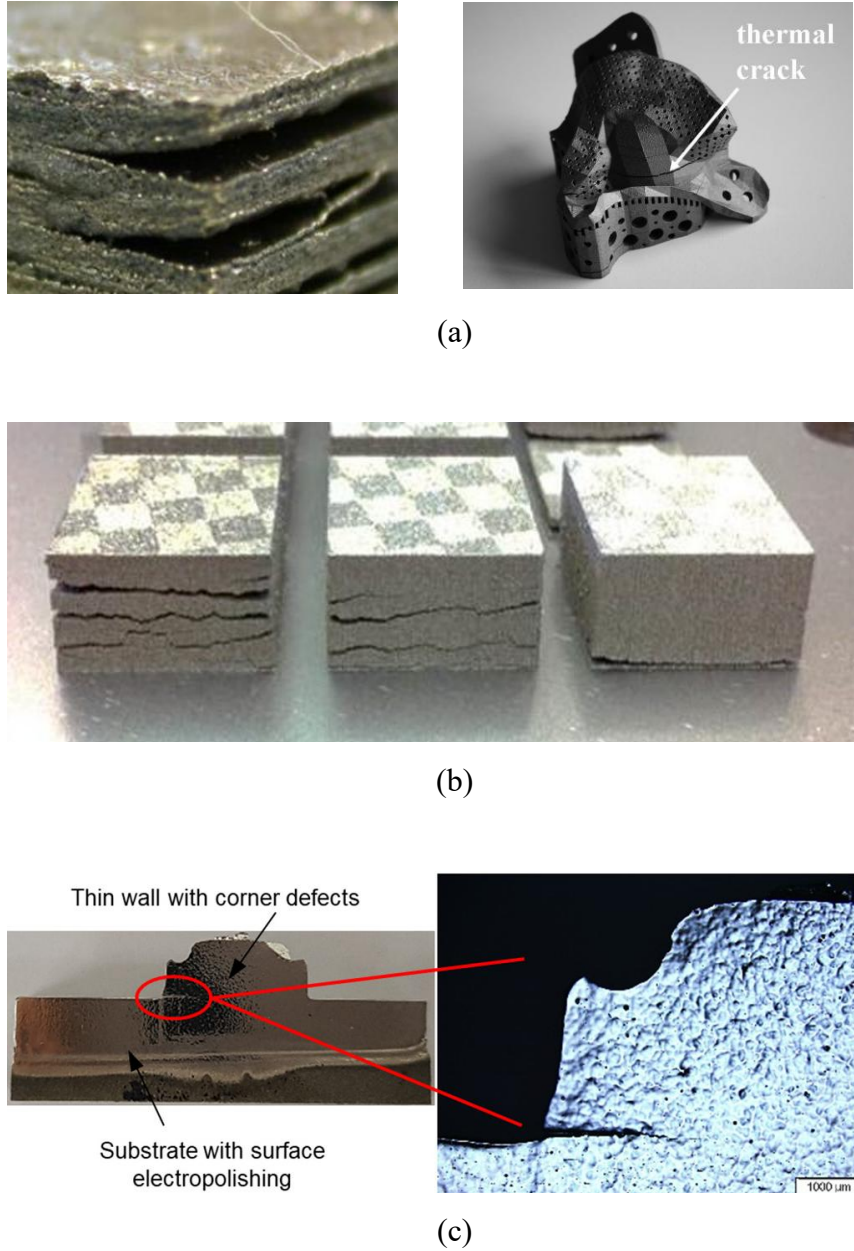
Examples of defects commonly observed in LPBF-manufactured components, including layer delamination and cracking due to thermal stresses (a), cracking and distortion in bulk samples (b), and localized defects such as thin-wall corner cracking (c), reprinted from Refs. ^{38,39,41}. Used with permission.
